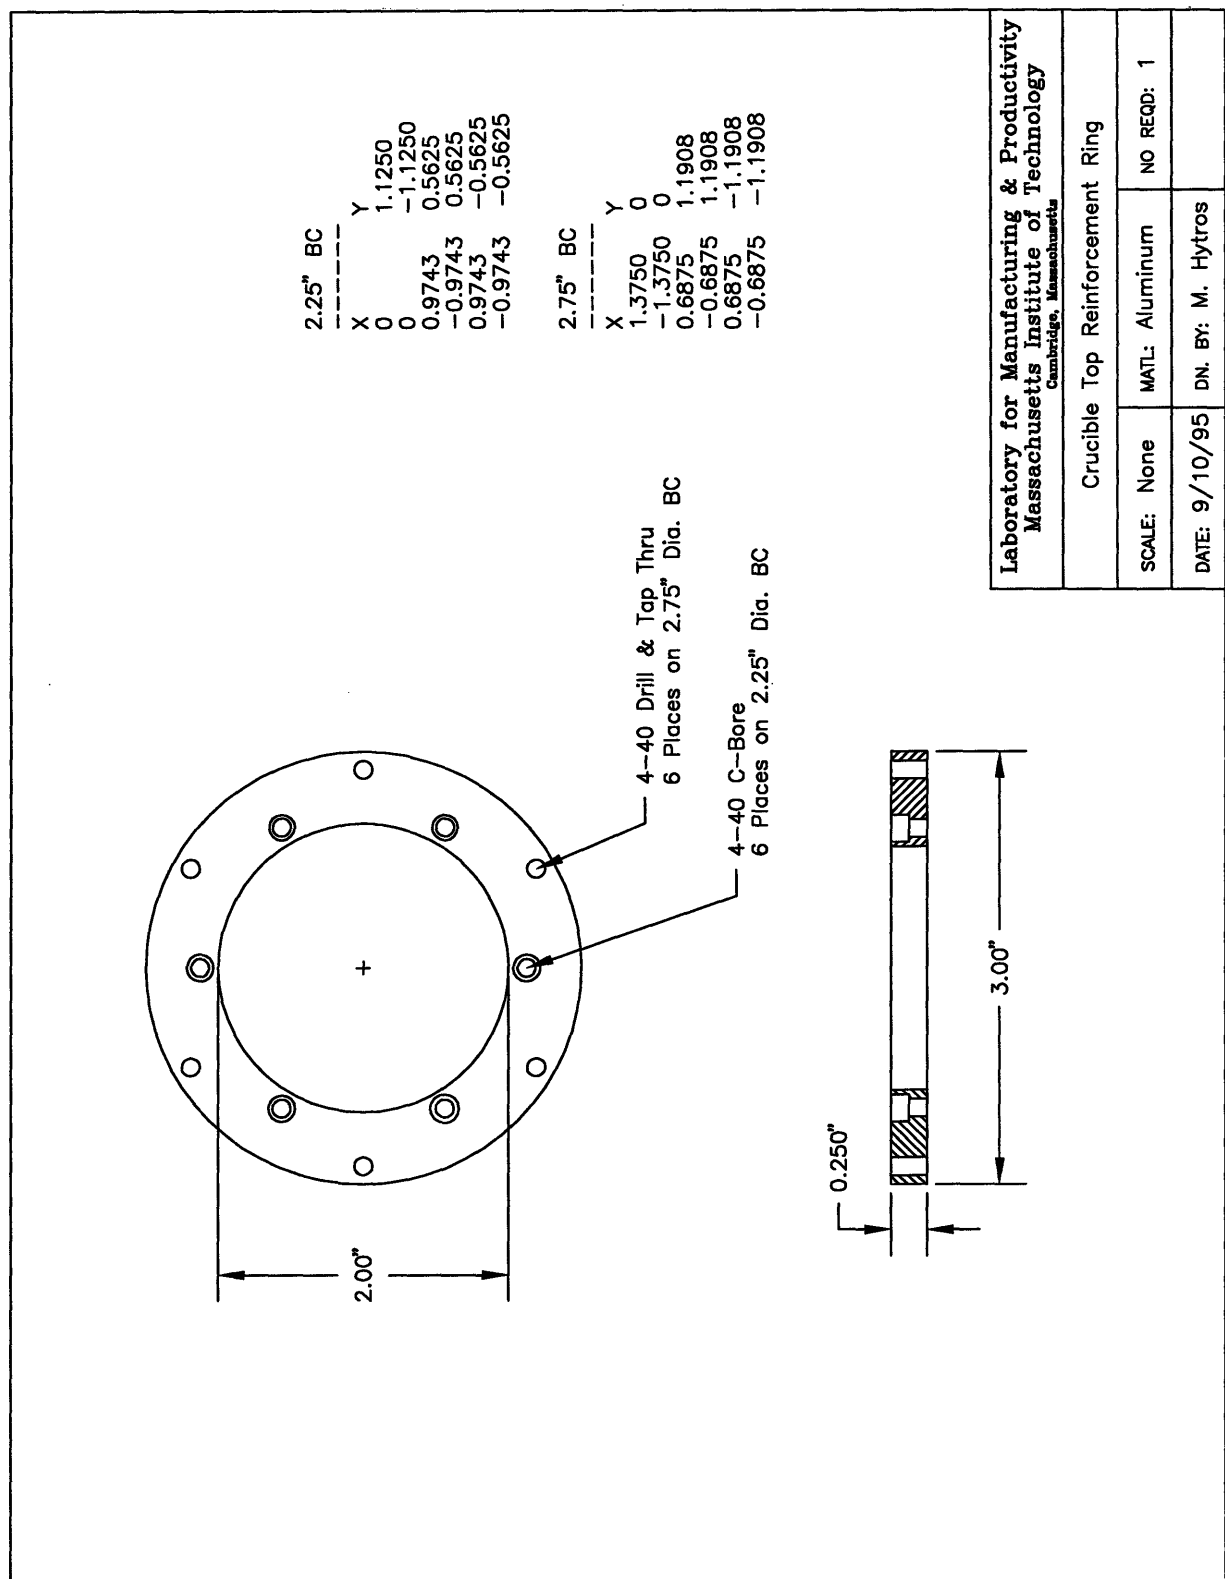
Detail Drawing of Crucible Reinforcement Ring
